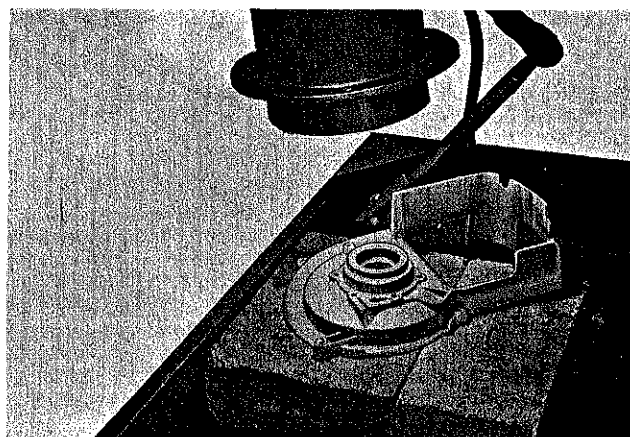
Using a heat lamp to heat the crankcase cover prior to installing the crankshaft and ball bearing.
